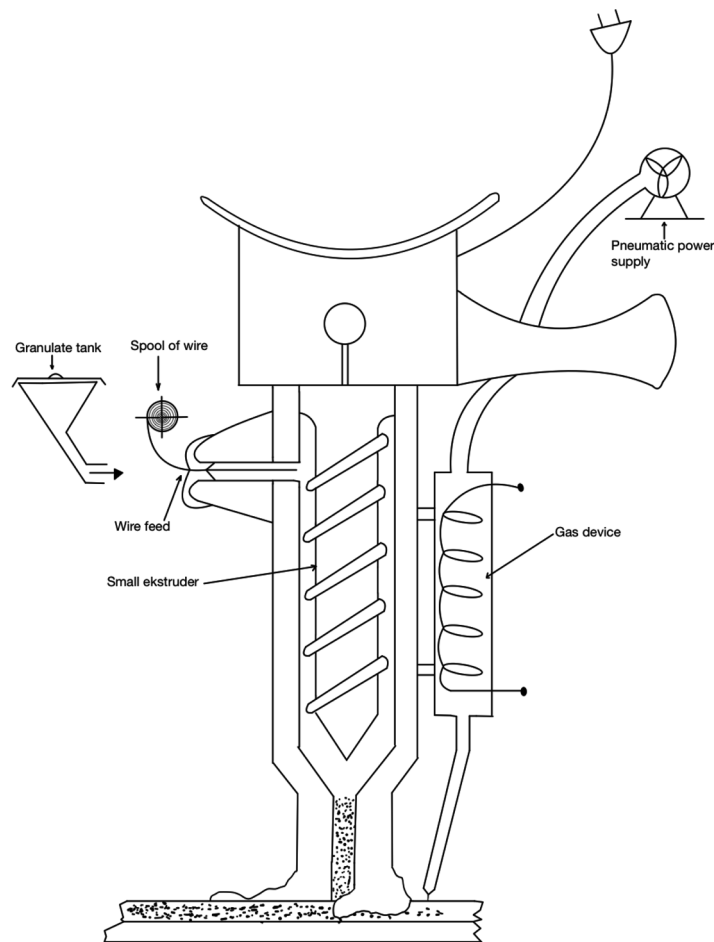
Scheme of the extrusion welding device based on [4]
